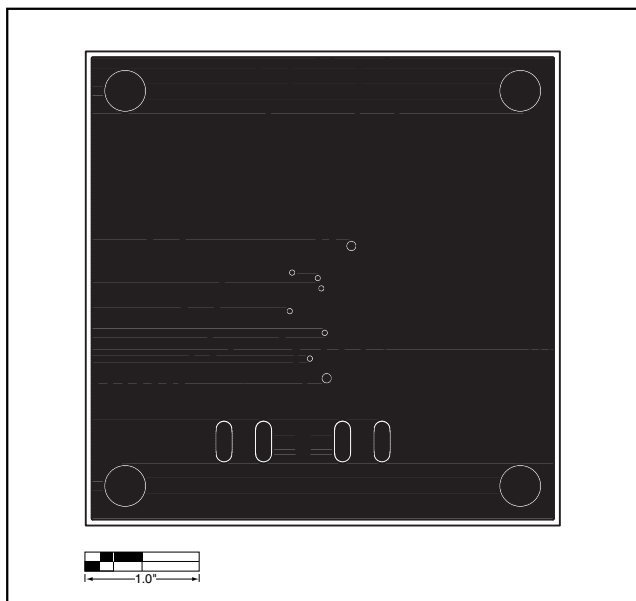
MAX2383 EV Kit PC Board Layout—GND Plane 3
